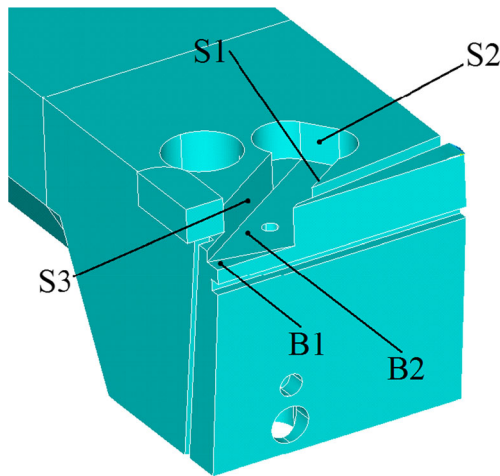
Surfaces of the tool holder, which are in thermal contact with the cutting tool
